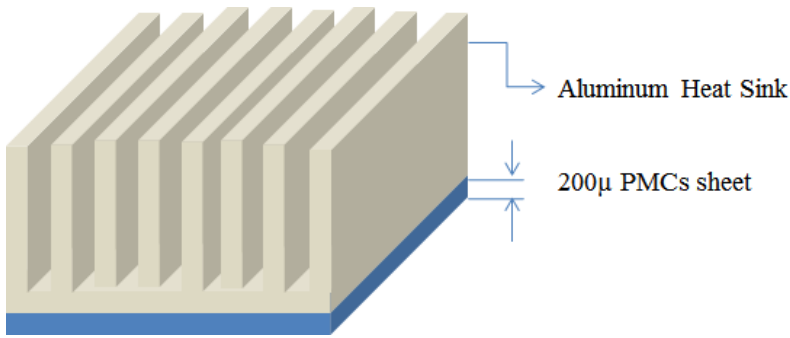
Modified heat sink scheme with electrically insulating composite.
